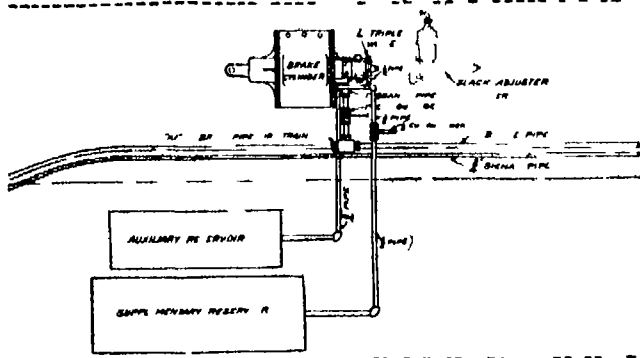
IMPROVED PASSENGER BRAKE EQUIPMENT TYPE L.N.
